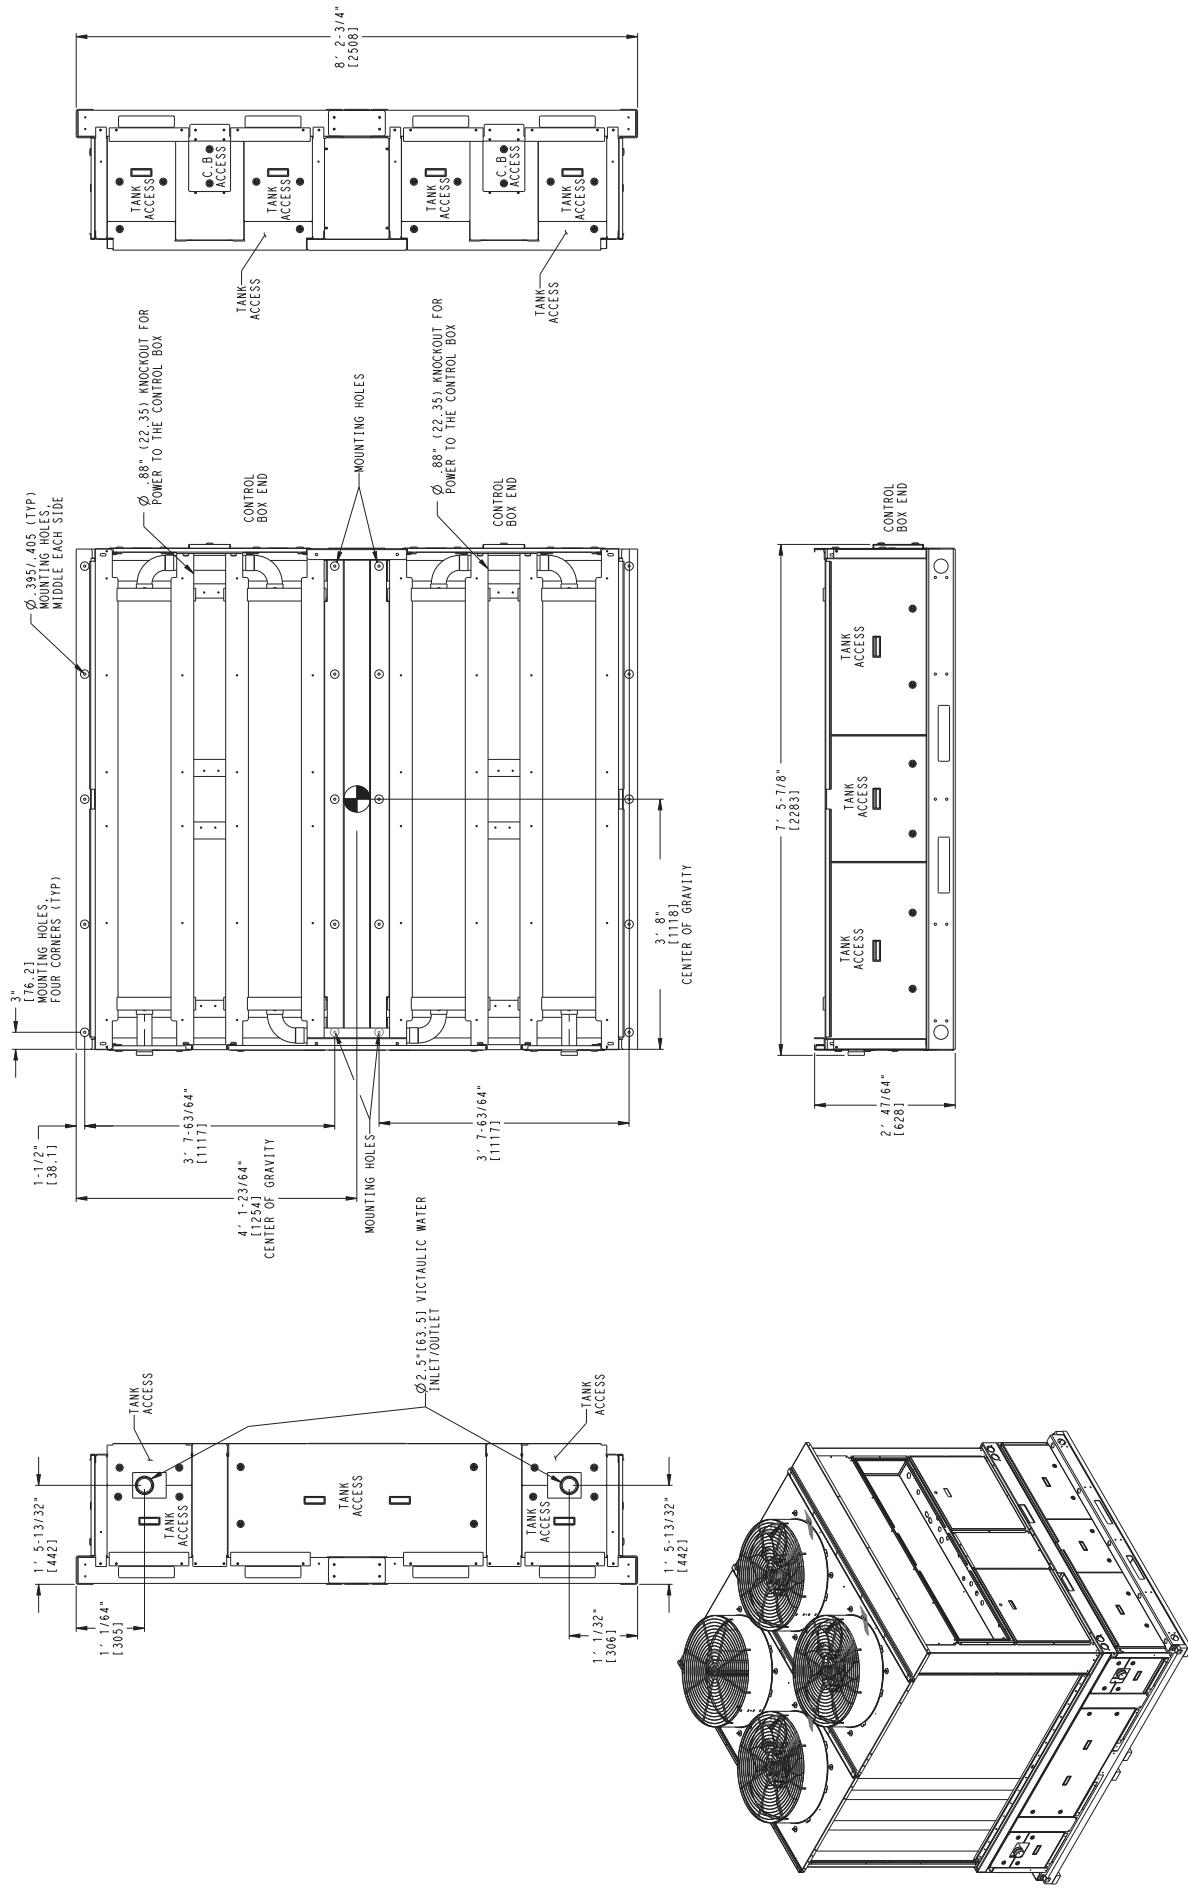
Accessory Storage Tank Dimensions — 30RAP035-060 Units
